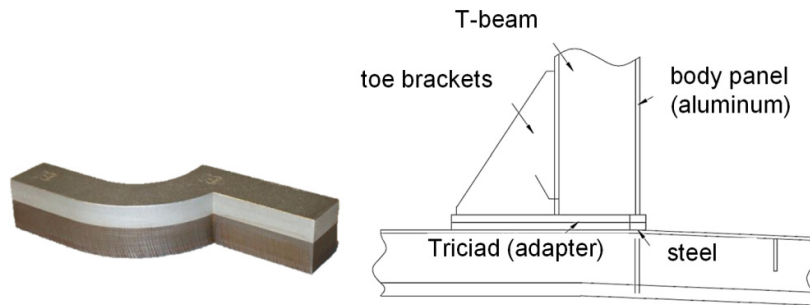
Explosive welded adapter (left) (Buijs2004) and a typical application of steel-aluminum components in the ship sector (right) (FSW-Ship project, 2013).
